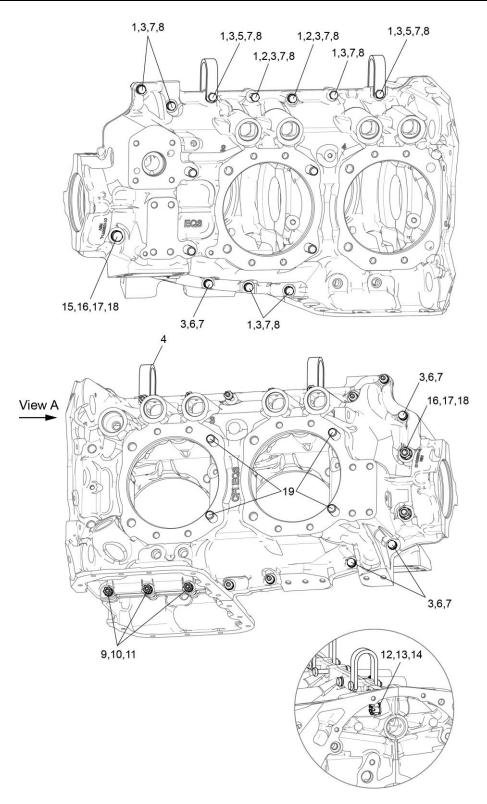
B Crankcase Attaching Parts (C1B6 and C3B6)
